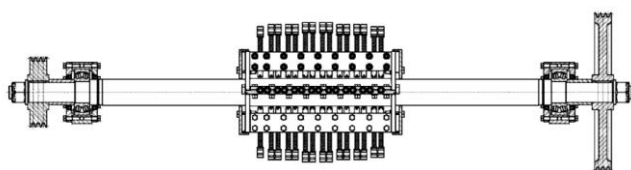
Four-section rotary mixer: (1) mixer section; (2) support; (3) adjustable screws; (4) V-belt transmission; (5) electric motor; (6, 8) shielded input and output sections; (7) seal.
